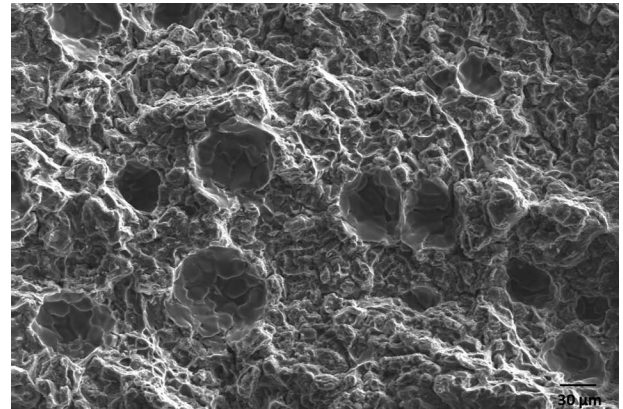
Higher magnified image of the fracture surface shown in Fig. 143. Weld porosities are seen
